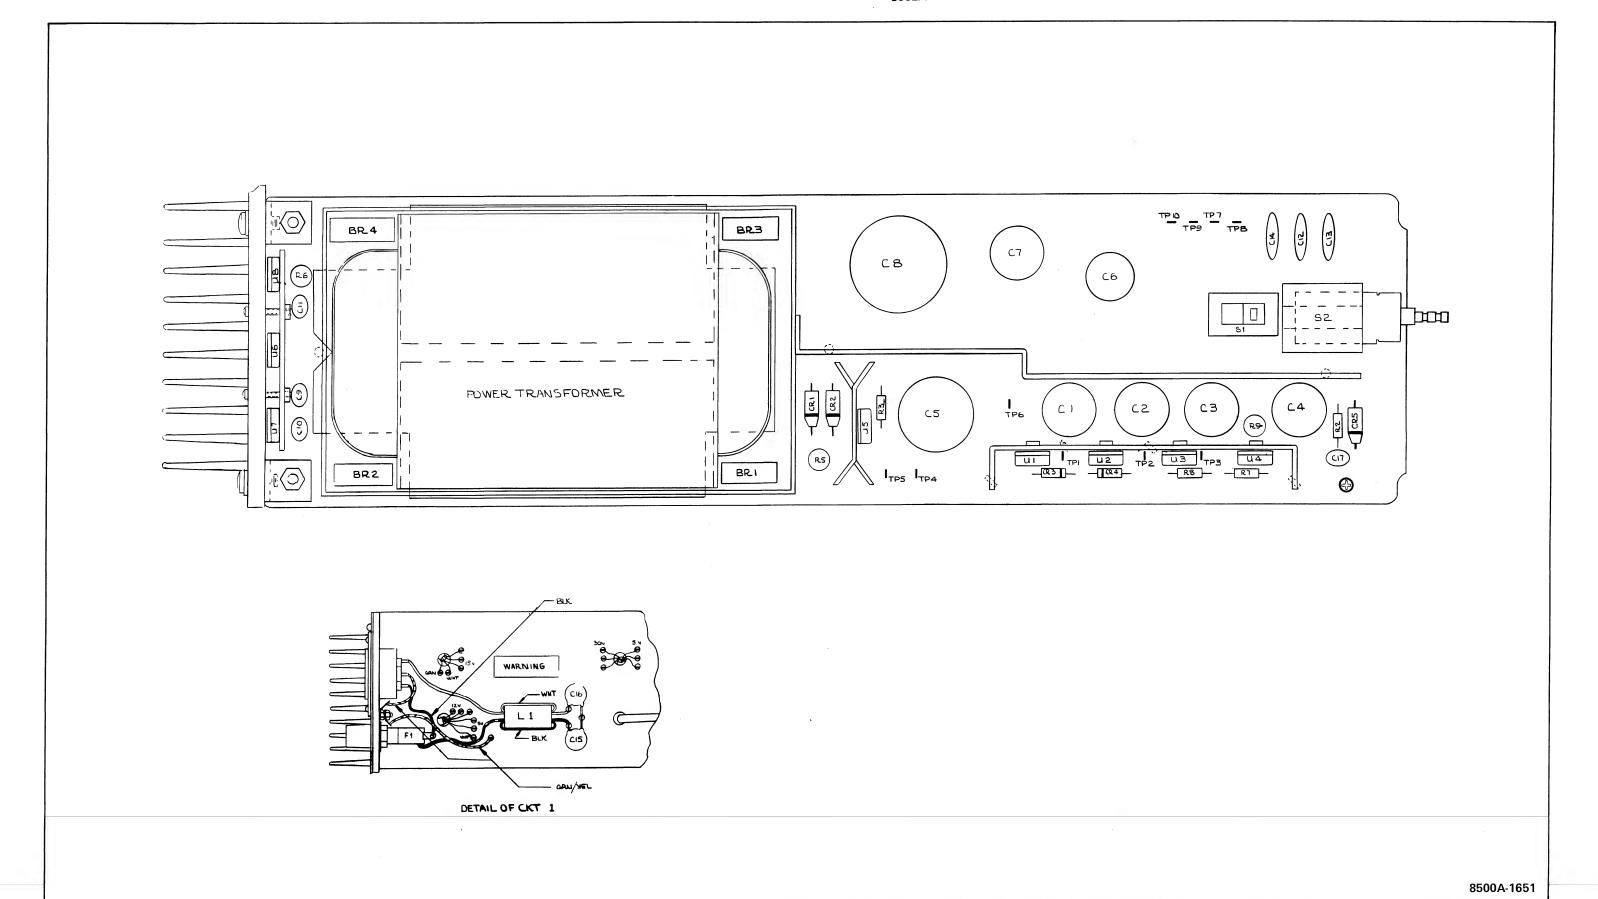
A4 Power Supply PCB Assembly— Type 51
